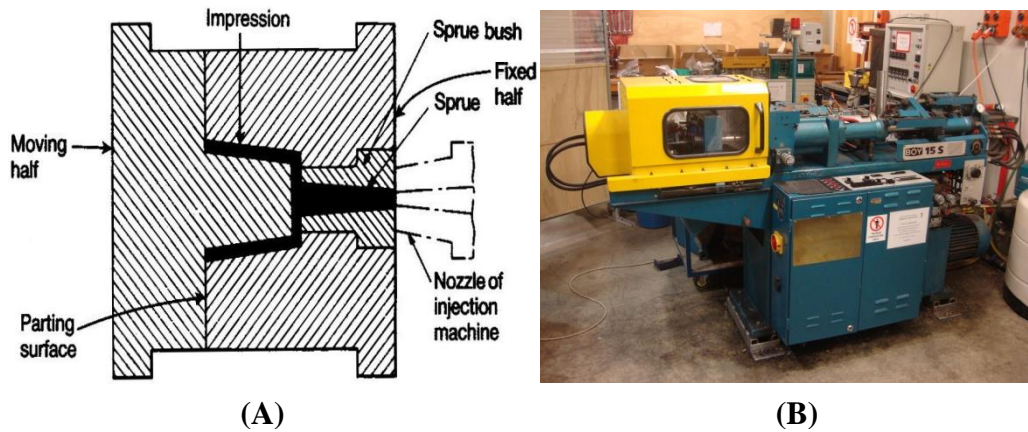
A) Injection mould halves [33] B) a laboratory injection moulding machine
